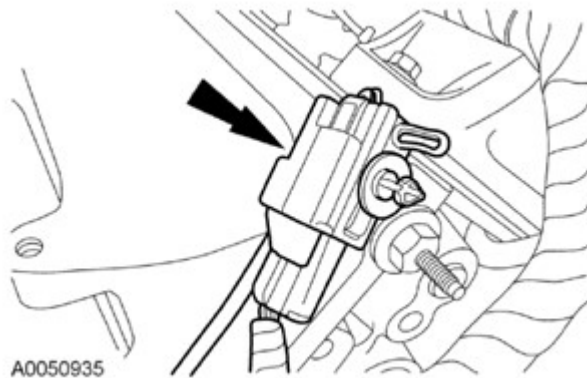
Identifying Cylinder Head Component Location (1 Of 3)
